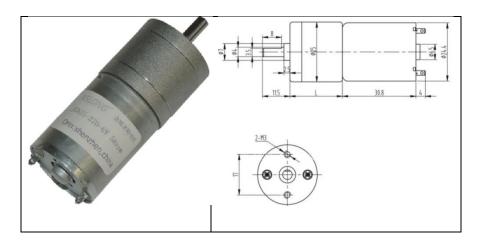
DC motor 12V (JGA25-370) and dimensions (mm)
